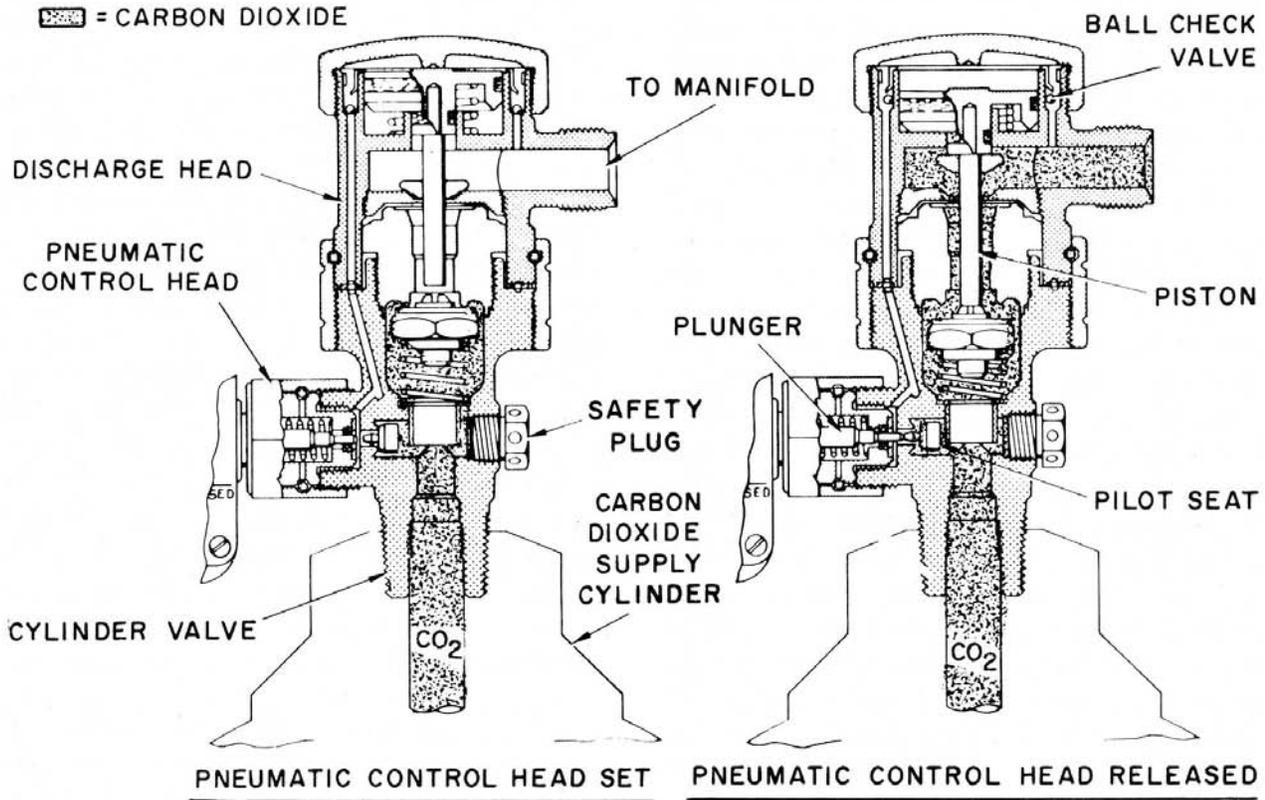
Cylinder valve, pneumatic control head, and discharge head.
